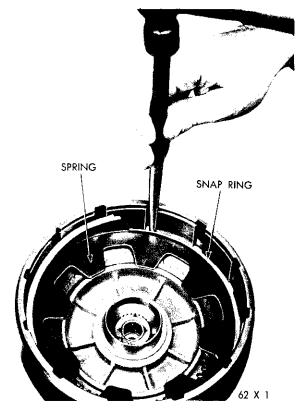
Installing Rear Clutch Spring and Snap Ring
